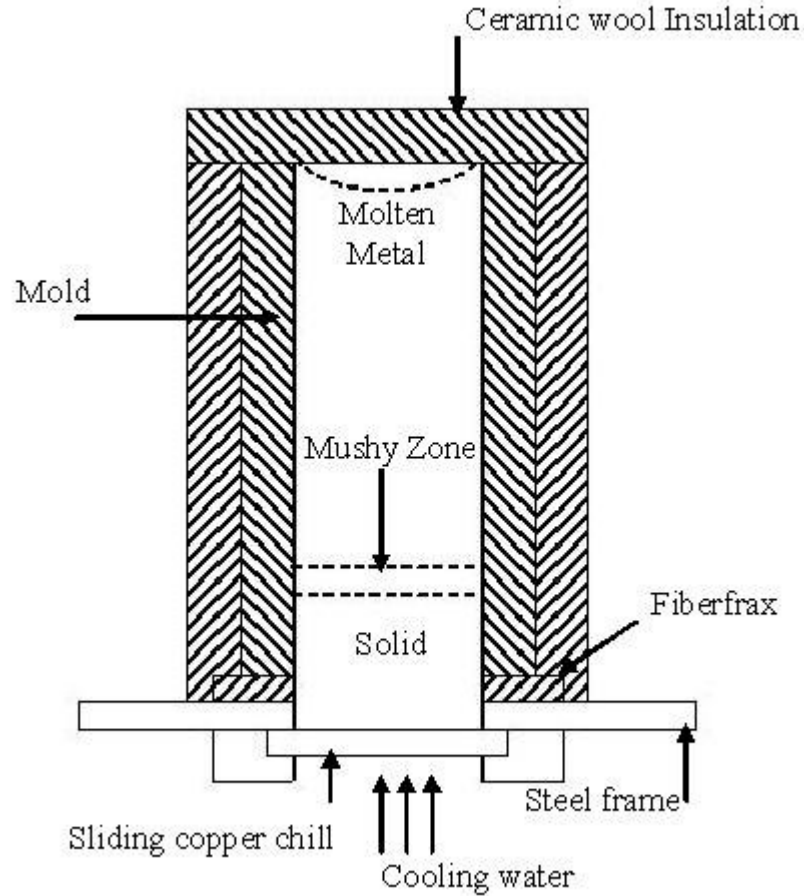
Scheme of experimental setup for a unidirectional solidification casting [3]
